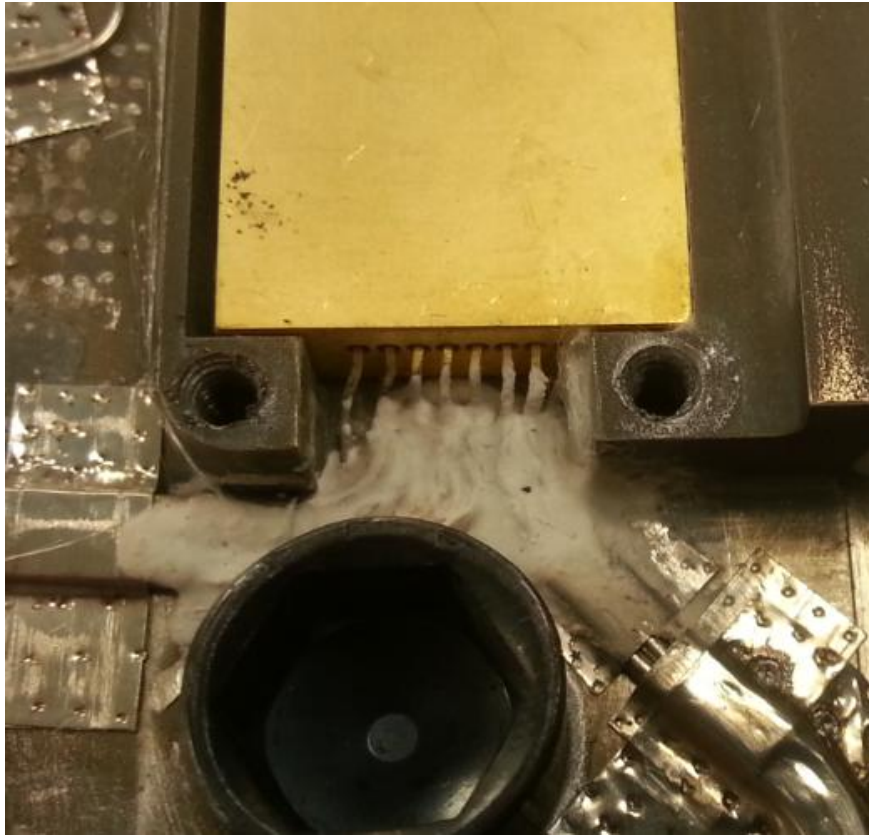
External Electrical Connections of Electrical Board on Seal Plate
